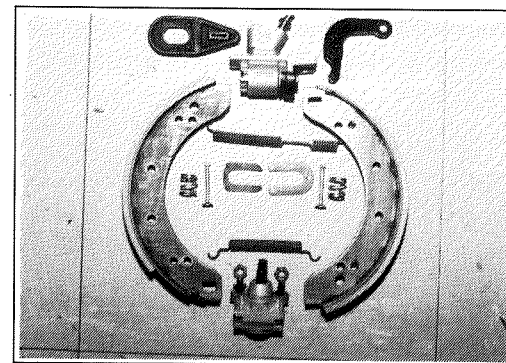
Rear brake parts ready to go. Note that different slave cylinders across the range of our cars look similar but may contain smaller/larger diameter pistons so make sure you buy the right ones for your car.
